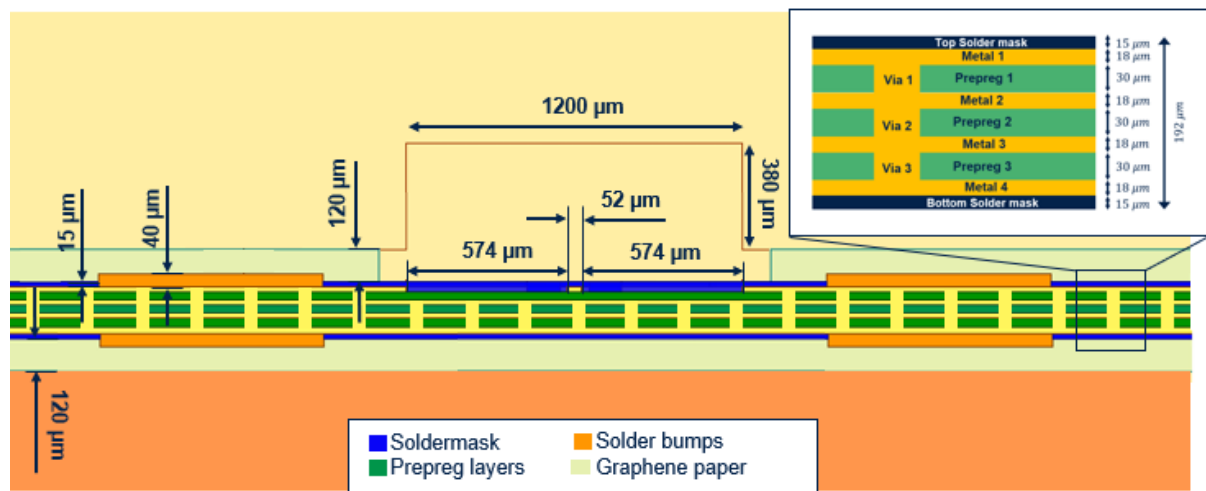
Cut view of SHM module illustrating the IF line integration in a hybrid packaging solution.
